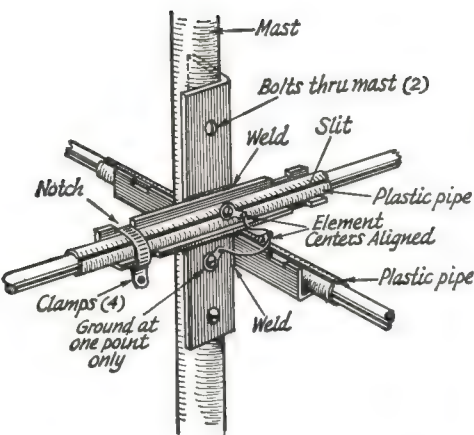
The elements are insulated from the angle-stock mounting bracket by sections of plastic pipe that have been slit. The connections shown, made with sheetmetal screws through the slit opening, should be made at the exact center points of the elements. These points are connected to the mast with a single short common lead. The bracket might also be made by assembling the angle pieces with bolts, instead of welding.
